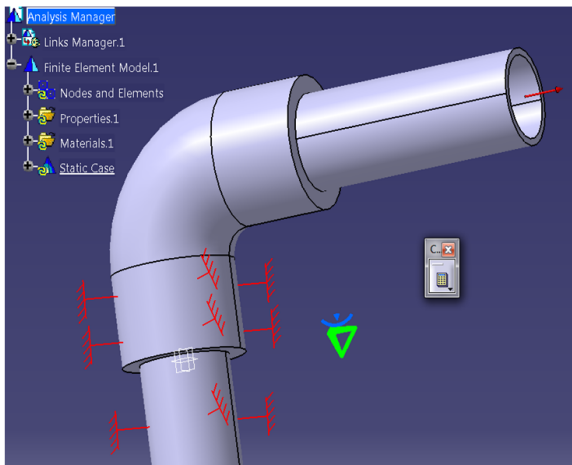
Establishing the constraints and loads for the polyethylene fitting - pipe assembly
